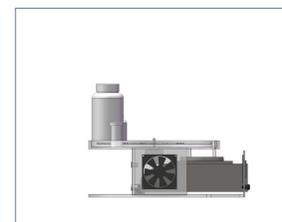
SolidWorks® Assembly Model of Prototype Device (Left Side View)
